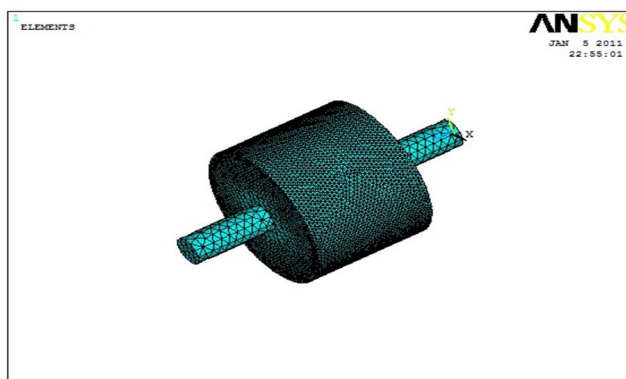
Three-Dimensional Finite Element Model Of Roller Assembly
